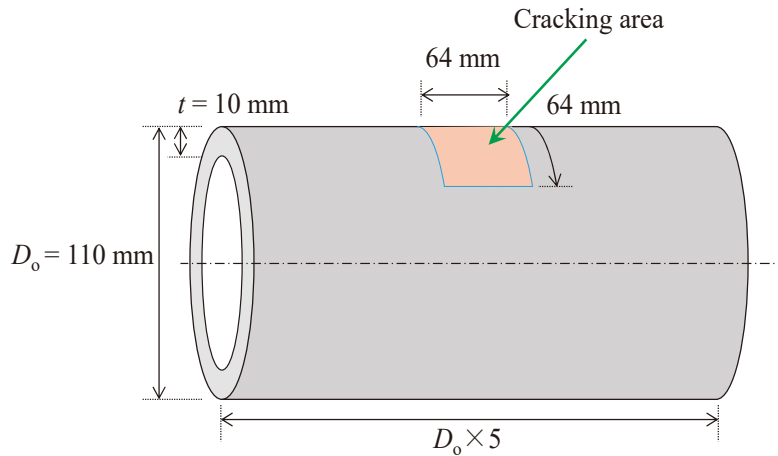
Straight pipe with single or multiple cracks at inner surface used for failure analyses.
